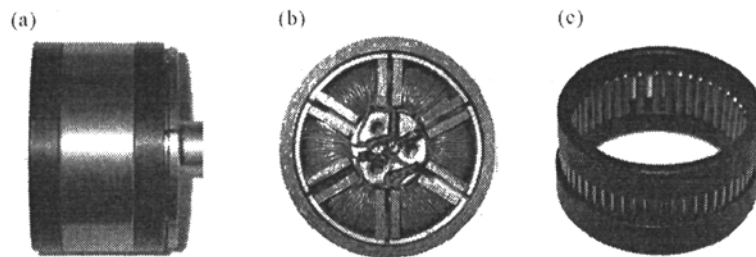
(a) Piston head; (b) piston head interior; (c) location of magnets
